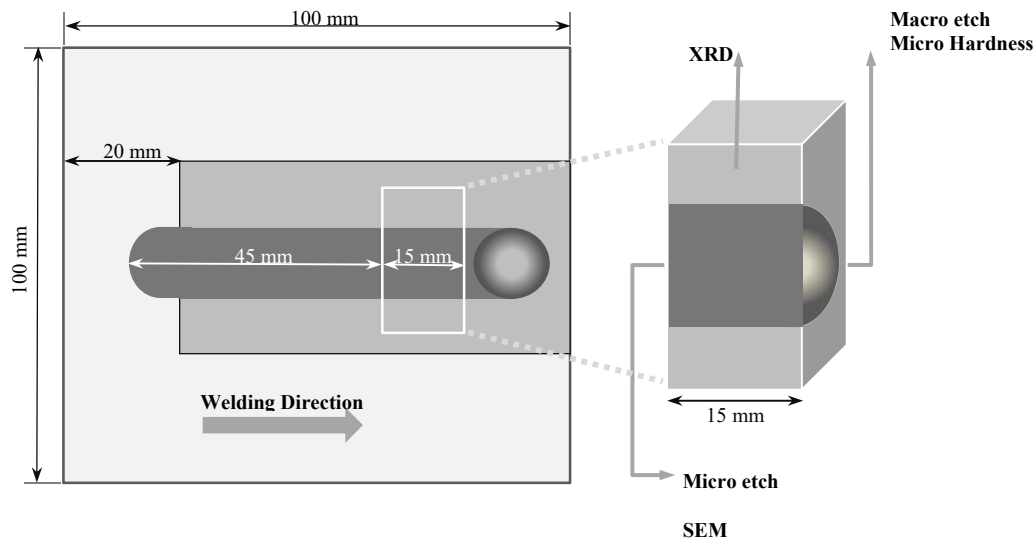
Schematic view of tests piece locations on a flux coated sample
